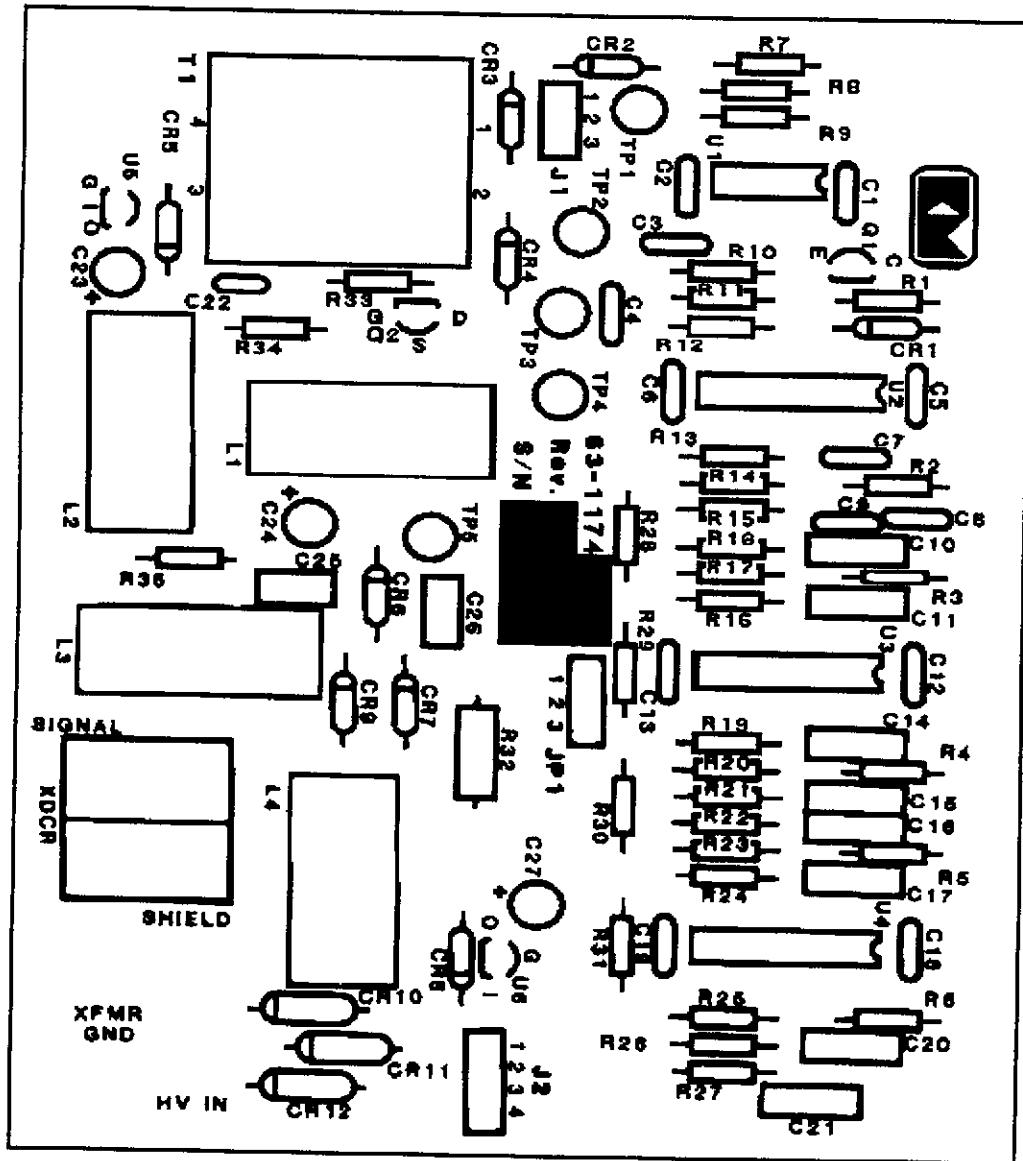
Assembly Drawing of the Filter Module Board (100-foot System), P/N 63-1174.
